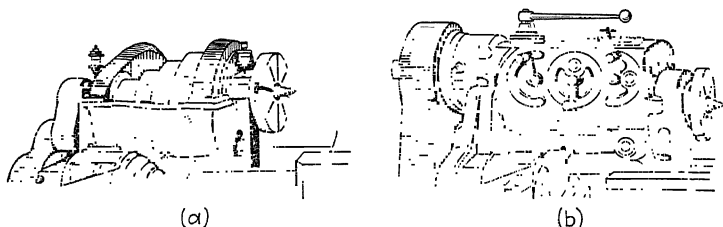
Types of headstocks: (a) cone-pulley and back-gear drive; (b) geared head.
